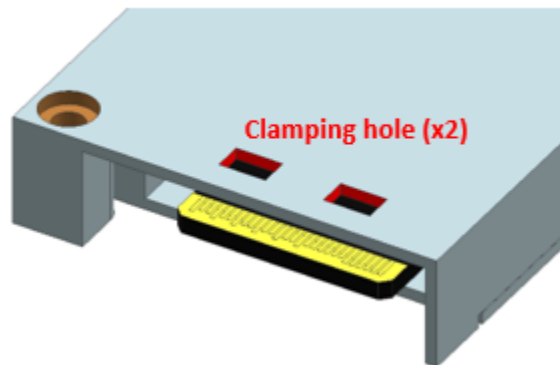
Clamping hole to lock the enclosure with receptacle connector
